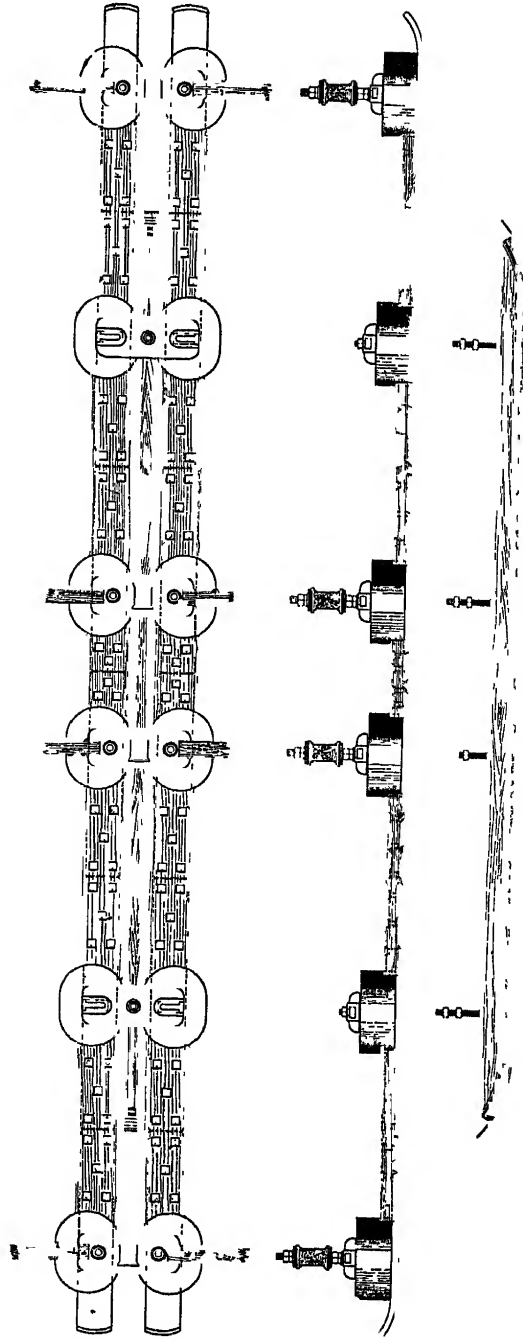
Loran System—Plan and Sectional Elevation of Magnets and Shoe
